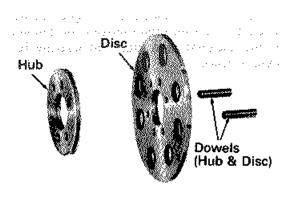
Accessory Drive Gear, Exploded View 55E1086 6-8
